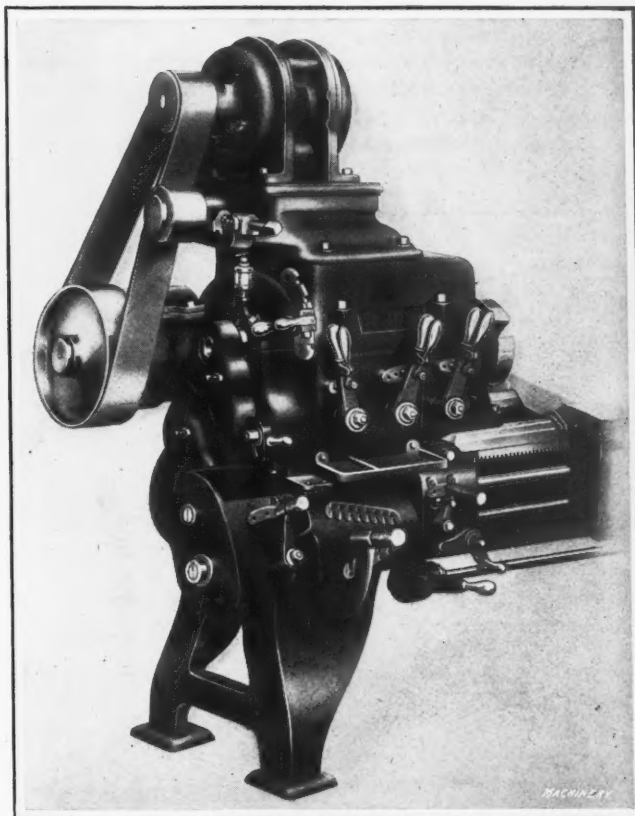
Headstock End of Lathe showing One Arrangement of Direct Motor Drive
